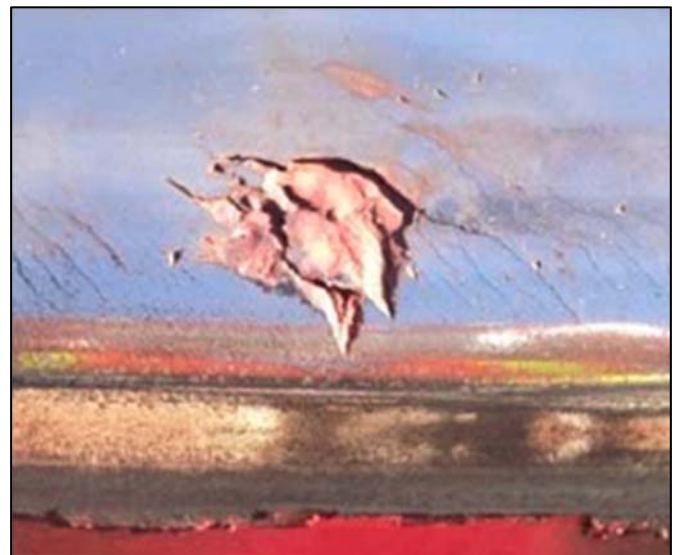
Electric Flash Butt Weld Surface Degradation
